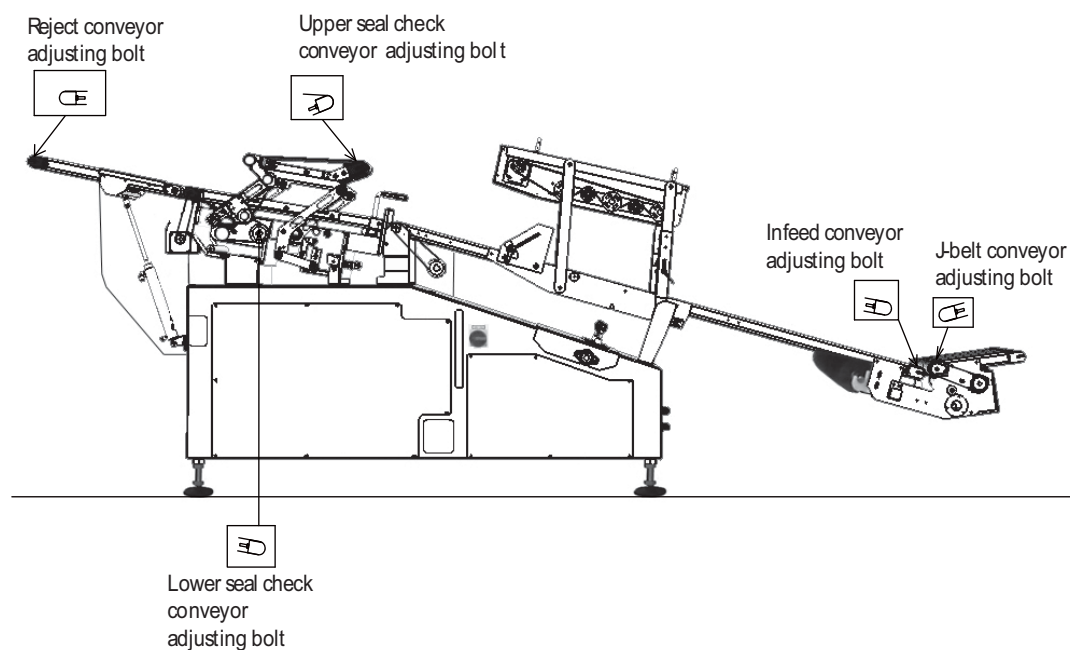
Conveyor Tension Adjusting Bolt Position Chart
